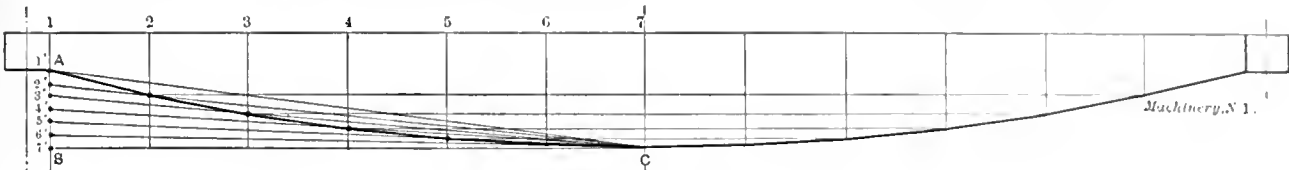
Laying out a Girder of the A Type, Fig. 24
